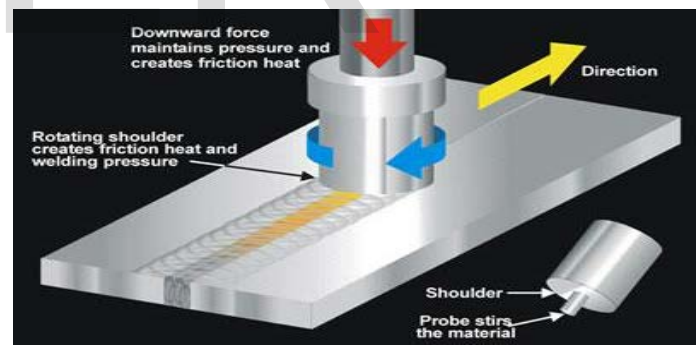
FIG: SCHEMATIC VIEW OF FRICTION STIR WELDING
